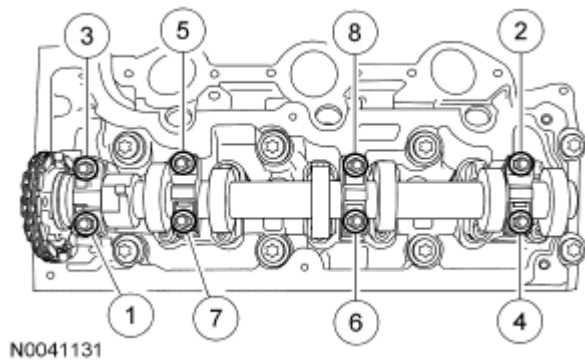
Identifying Camshaft Bearing Cap Bolts Removing Sequence
